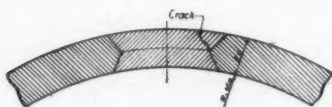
SHOWING CRACKING OF CAST IRON SUPPORTS OF THE DESIGN OF FIG. 3
